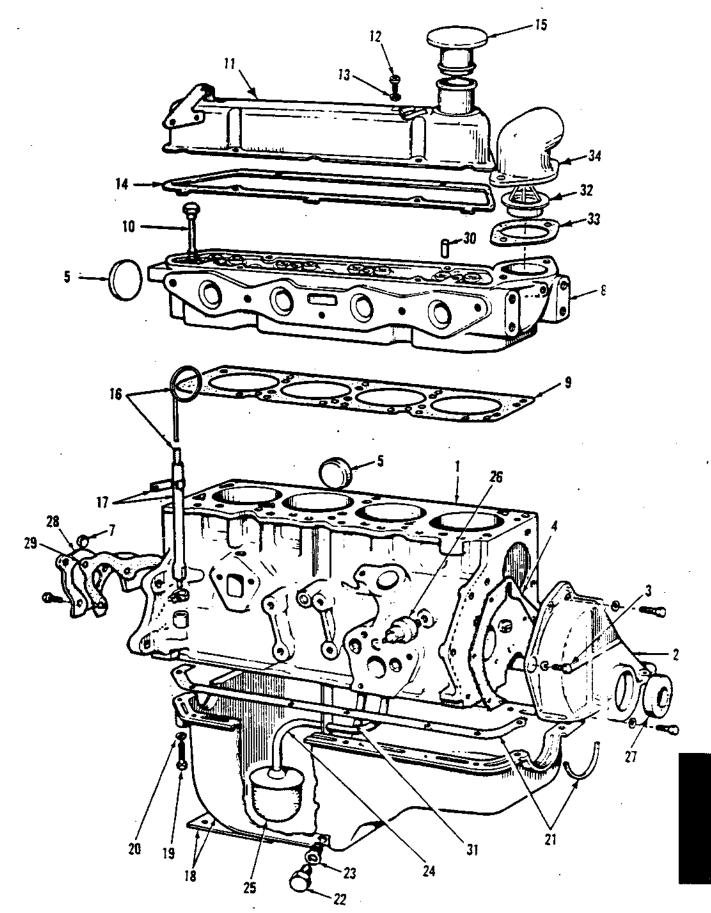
ENGINE BLOCK, HEAD, OIL PAN & EXTERNAL PARTS GROLP
